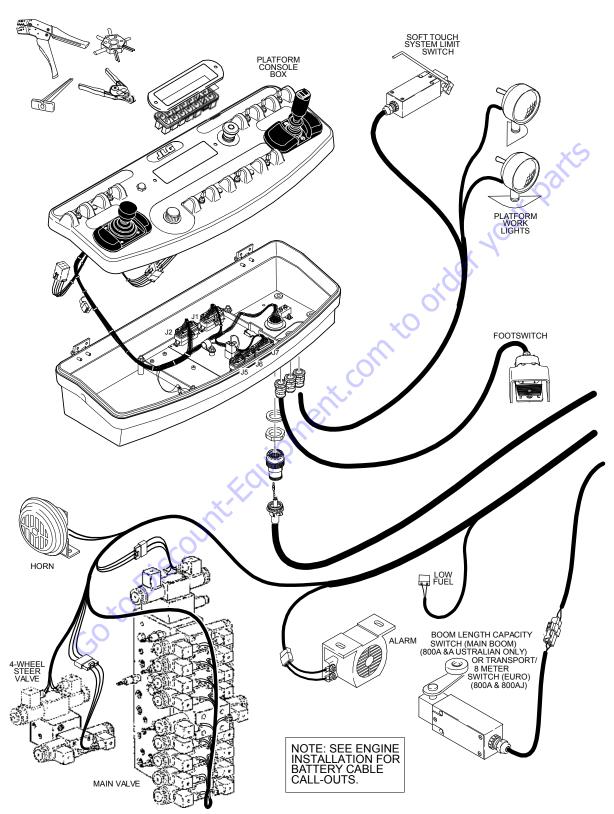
Electrical Components Installation (S/N 0300064432 to S/N 0300069000) - Sheet 1 of 2
